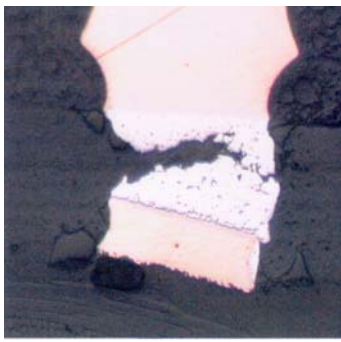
PCB Pad Lifting. NiAu PCB finish, Sn Component, Sn3.5Ag0.7Cu Paste.
